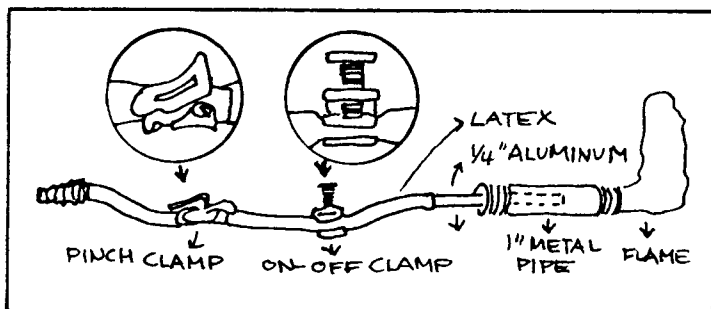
Detail of simple burner — $\frac{1}{4}$ -in. pipe laid inside length of 1-in. pipe.
